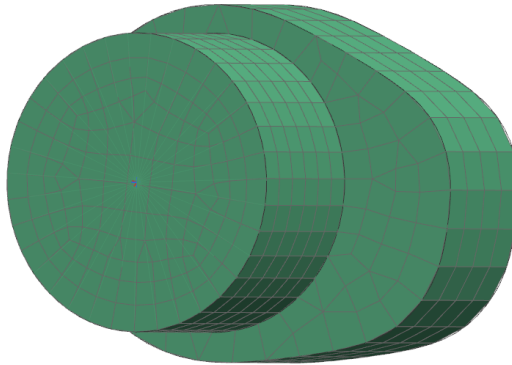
Meshed CAD model of the exhaust cam shaft.
